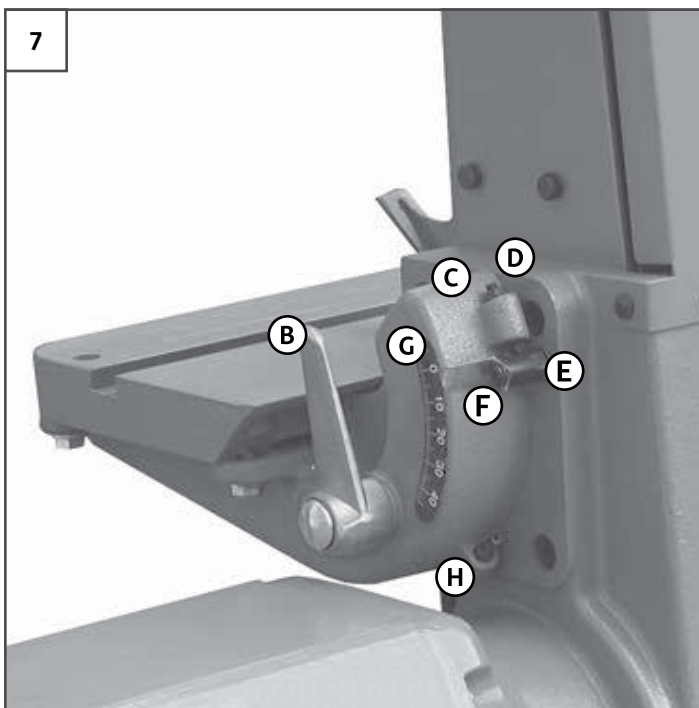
ADJUSTING BELT TABLE BEVEL STOPS
